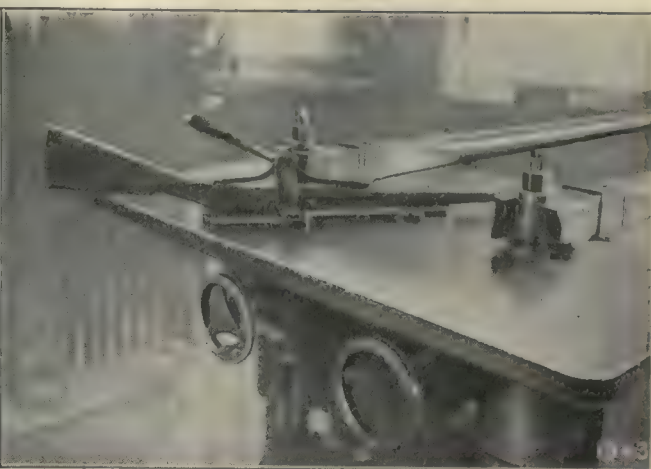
CUTTING GRASPING GROOVES, OPERATION 18
